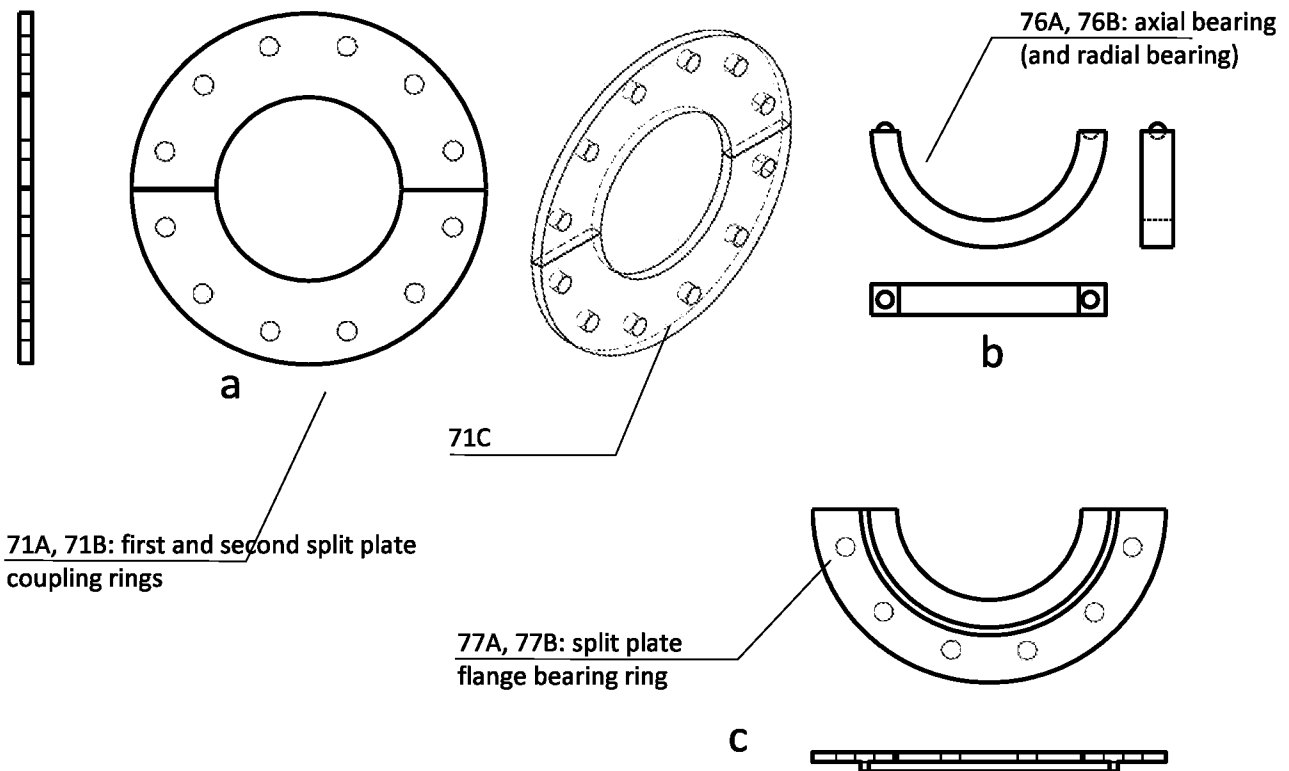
lateral and axial view and perspective views of the split plate coupling ring according to an embodiment of the invention, this is mounted 90 degs to the split in the plate (8), together with with the swivel clamp (7) also turned 90 degs.
